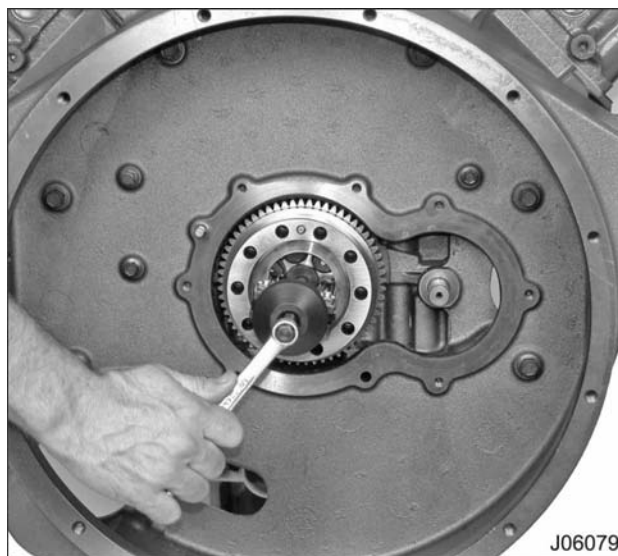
Removing the crankshaft secondary flange (stripped chassis)
